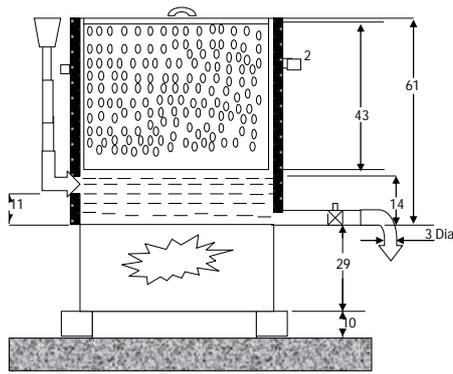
Cross sectional Layout of Rice Steam Parboiler (All dimensions in cm)
